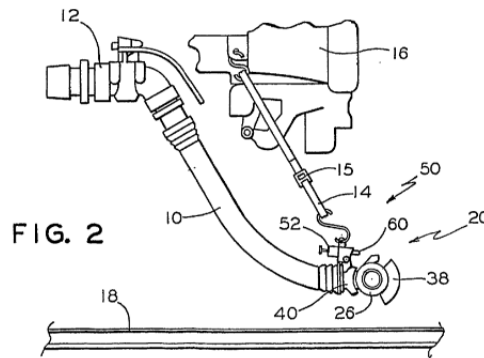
Drawing of an air brake hose assembly in patent WO/2006/026173A1.
